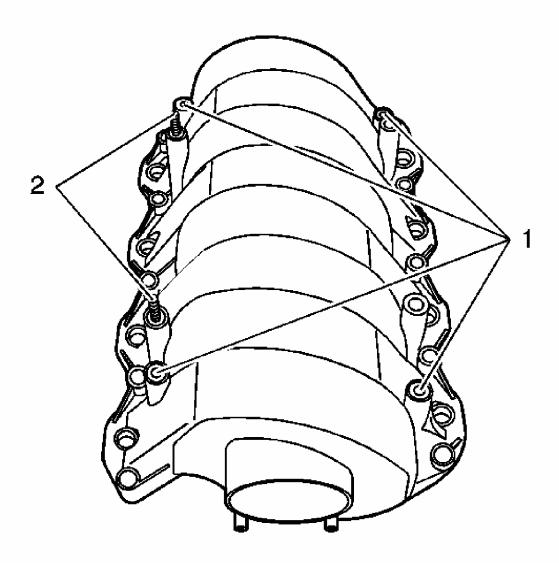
View Of Inspection Areas Of Intake Manifold Courtesy of GENERAL MOTORS CORP.
